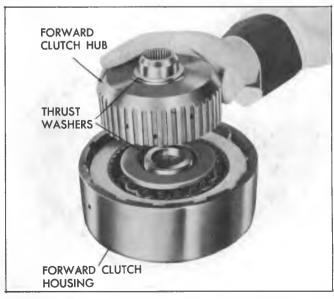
T-Removing Forward Clutch Hub and Thrust Washers
